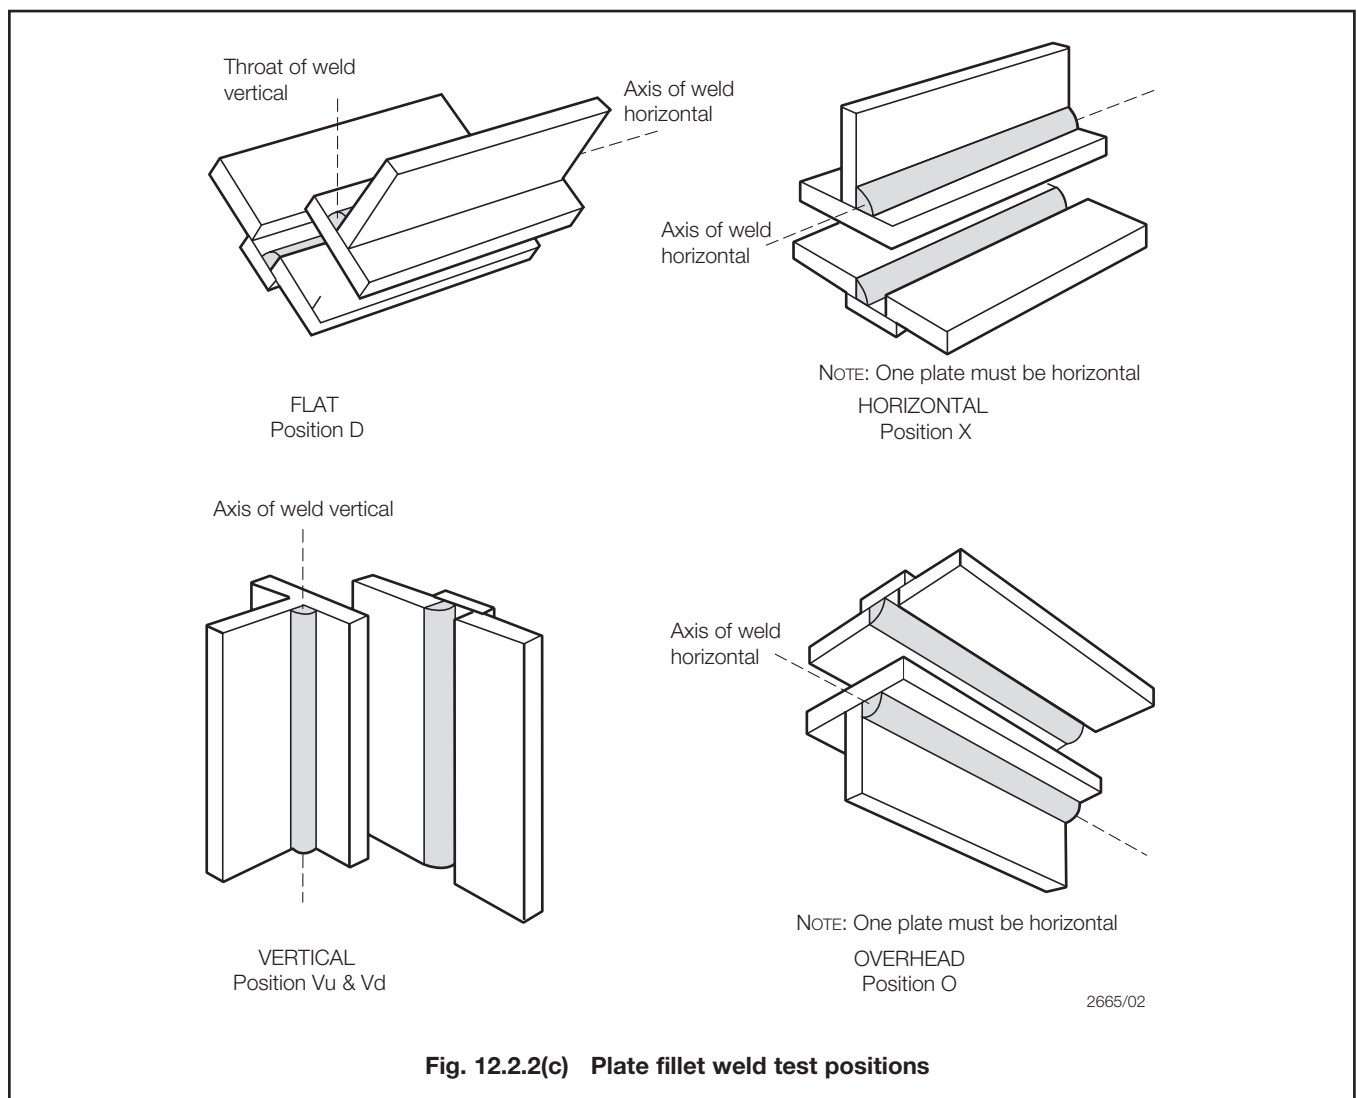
(c) Plate fillet weld test positions
